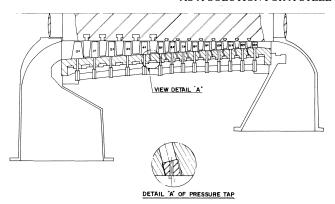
Lower Casing with Holes Made for Pressure Taps.
